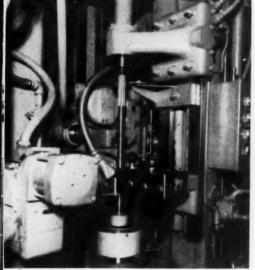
Climb hobbing of the helical spline creates high torque. A special collet chuck of high holding power and compact design is used to drive the transmission shaft.
